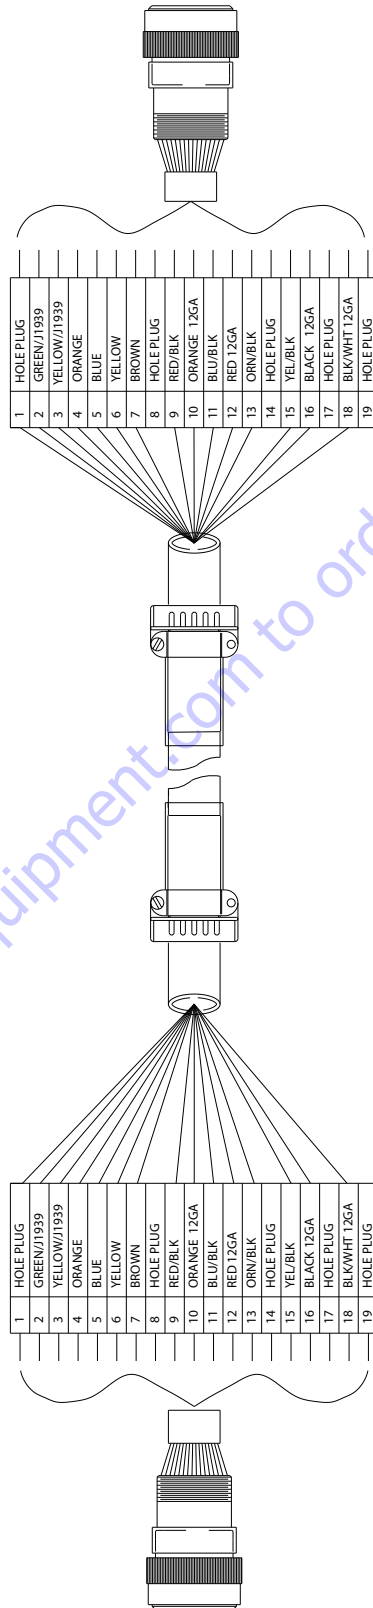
Platform Box Harness - Sheet 6 of 6
